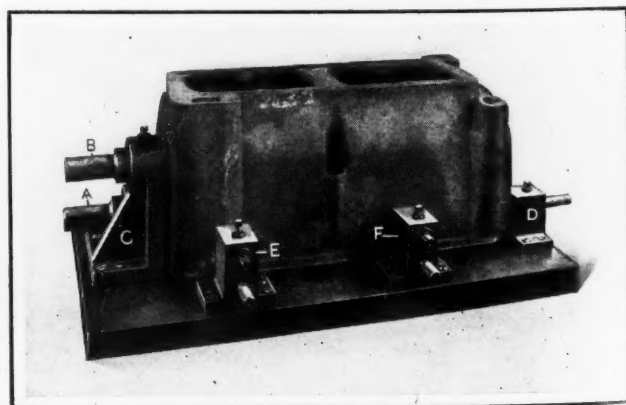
Manner in which Crankcases are Given a Final Inspection
